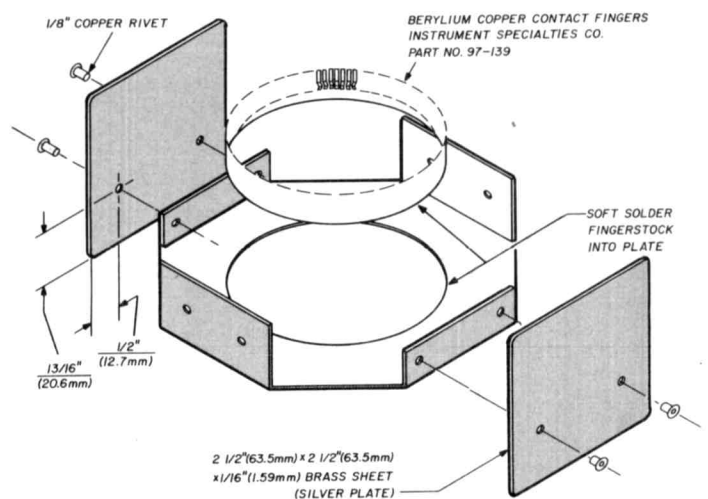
Anode collet and capacitor plate support assembly. The two fixed capacitor plates for C5 and C6 are mounted to the assembly using copper pop-rivets and then soldered. The two remaining bent-up edges are for mounting the blocking capacitors C3 and C4. The finger-stock is soft-soldered into the large hole in the center. A tight fitting aluminum disc helps to hold the finger stock in place while soft soldering with a hot plate.
